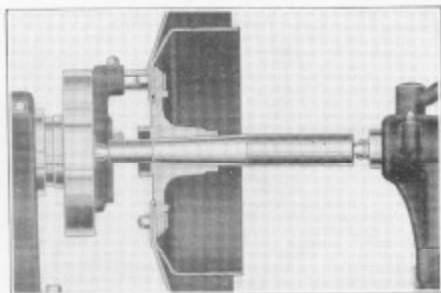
Set up of a Rear Wheel fitted with a Self-Centering Taper Mandrel
